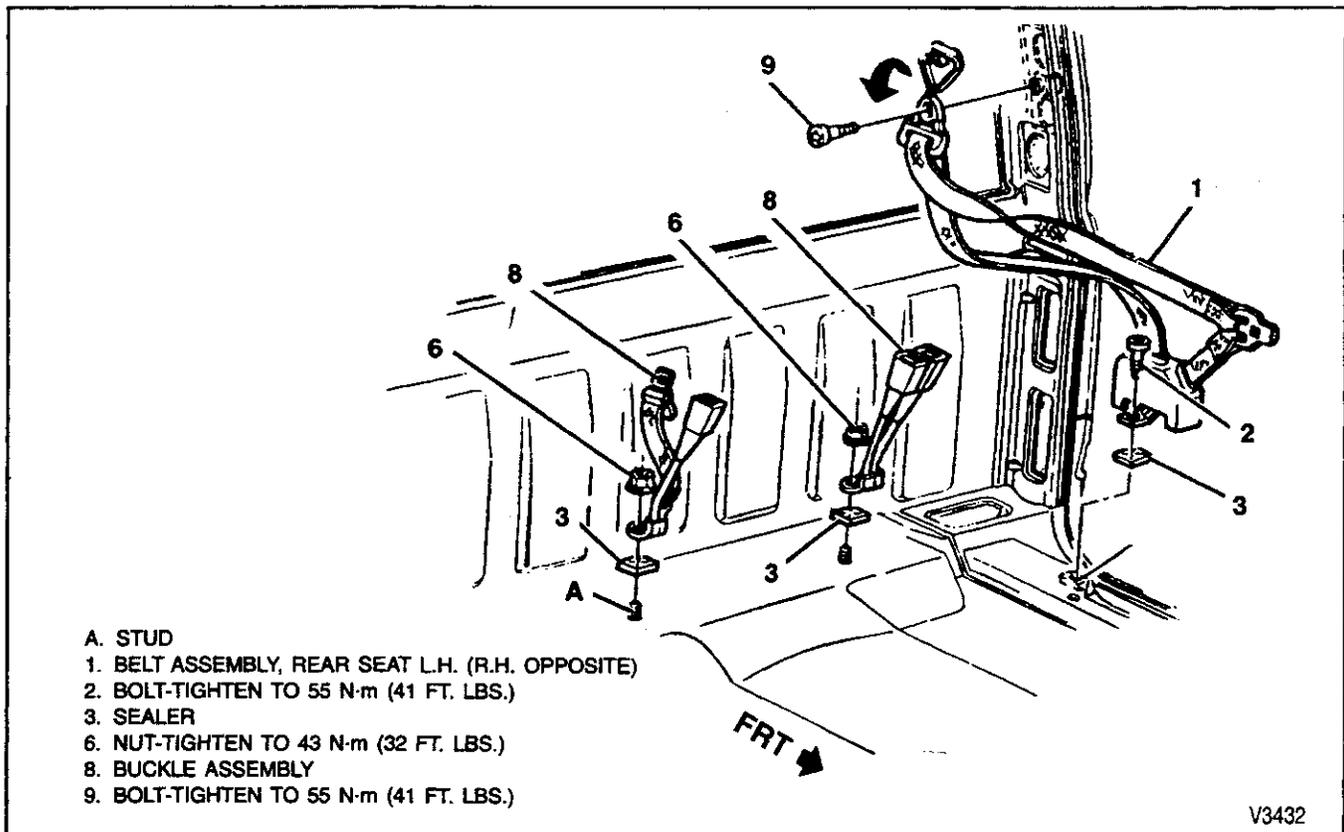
Rear Seat Belts (Crew Cab with Folding Rear Seat)
